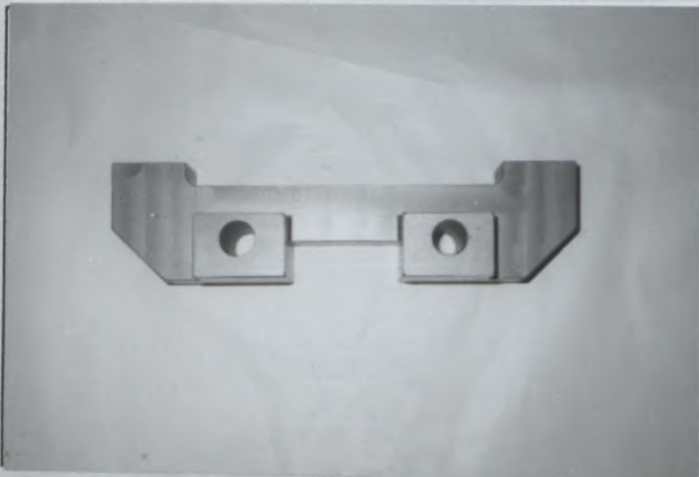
Rear caliper mounting bracket, TYPE A
